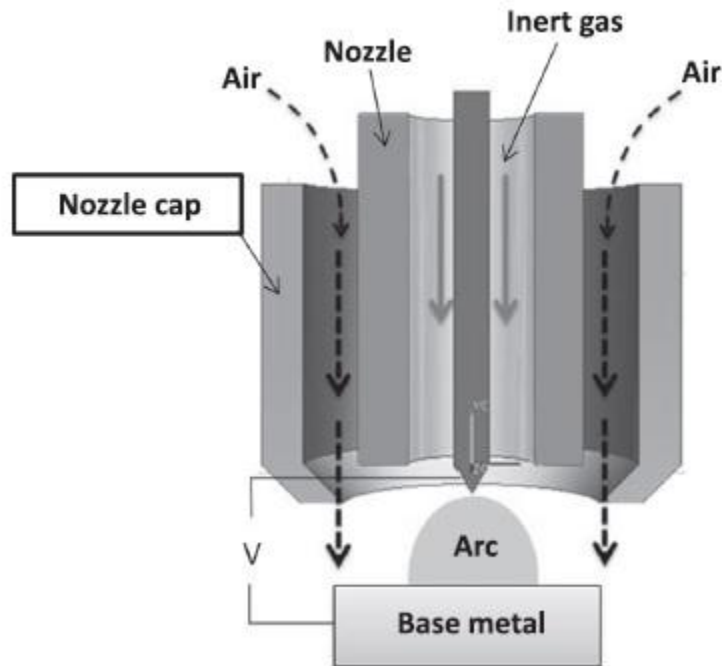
Schematic diagram of CA-TIG welding [Morisada et al. [2013]
